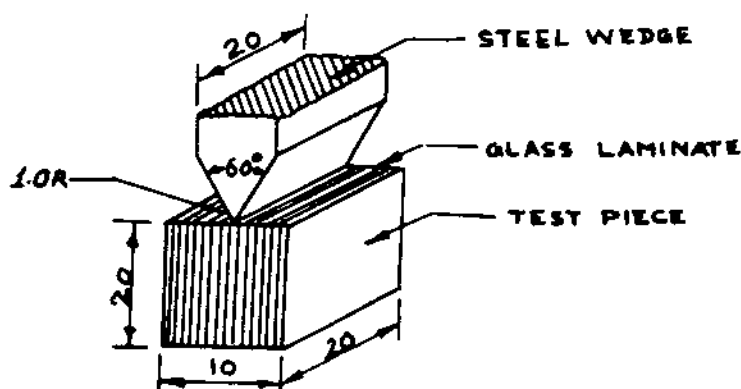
Specimen and Steel Wedge for Splitting Load Test.
